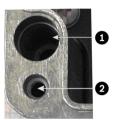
Holes for screws for mounting enclosure mounting; holes for screws for enclosure lid
